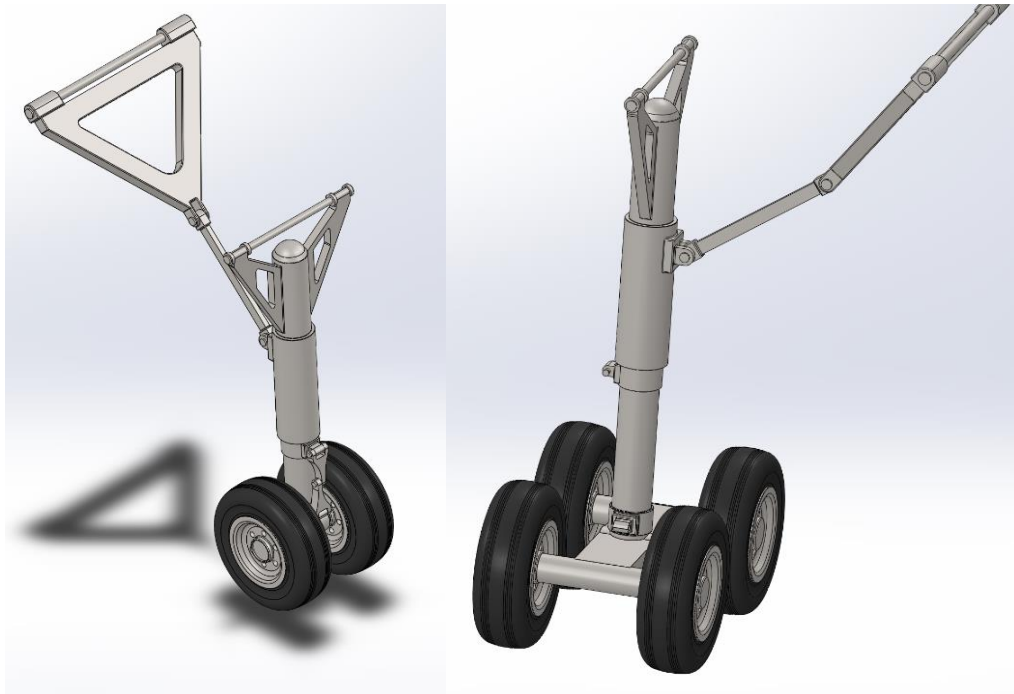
CAD Renderings of Landing Gear: Nose Gear (Left) and Main Gear (Right)
